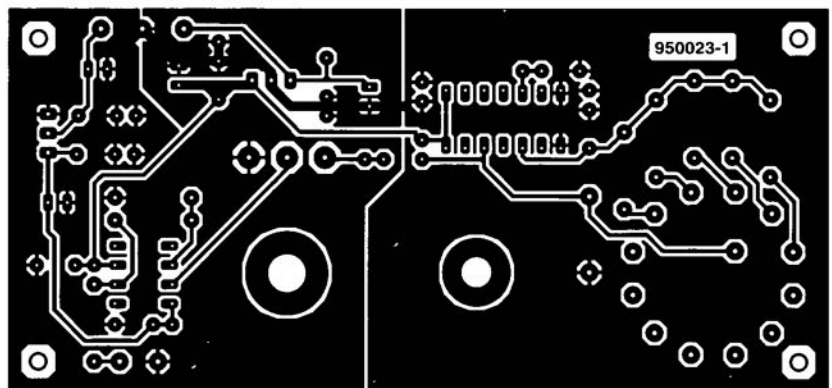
Track layout and component mounting plan of the single-sided printed circuit board for the RF signal generator (board available ready-made, see page 70).
